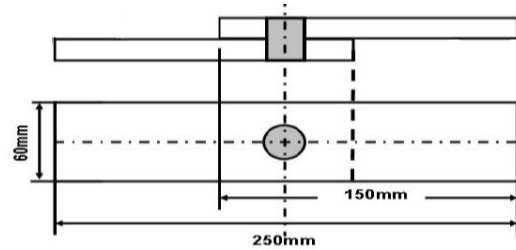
Spot weld joint plan of 316L stainless steel.
